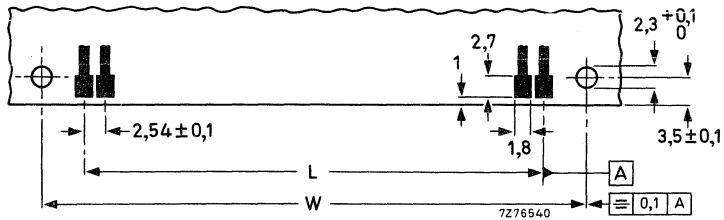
Recommended dimensions of the printed-wiring board to be fitted to the female part; see Table 5 for dimensions L and W.
